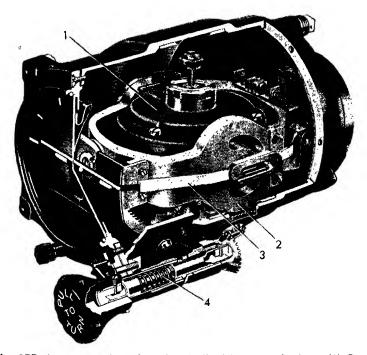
A cutaway view of an electrically driven gyro horizon. (1) Gyro assembly; (2) gimbal ring; (3) horizon bar; (4) caging mechanism. (Courtesy Sperry Gyroscope Company, Inc.)
